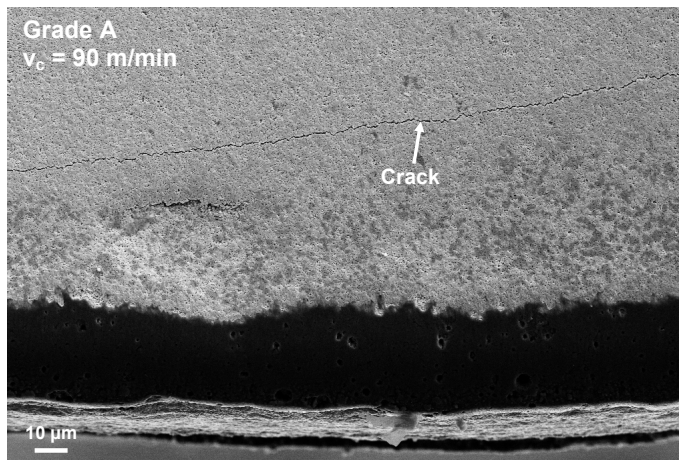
Example of a observed crack running roughly parallel to the edge of the cutting tool [148].
